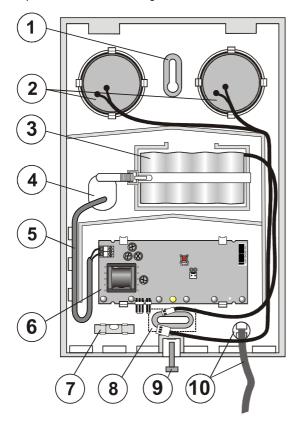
hole for installing; 2 – piezo sounders; 3 – NiCd battery; 4 – hole for cable; 5 – main power cable; 6 – PCB; 7 – spirit level; 8 – hole for installation with tampering detection; 9 – front cover screw; 10 – string with clip connecting the front cover for easy installation
